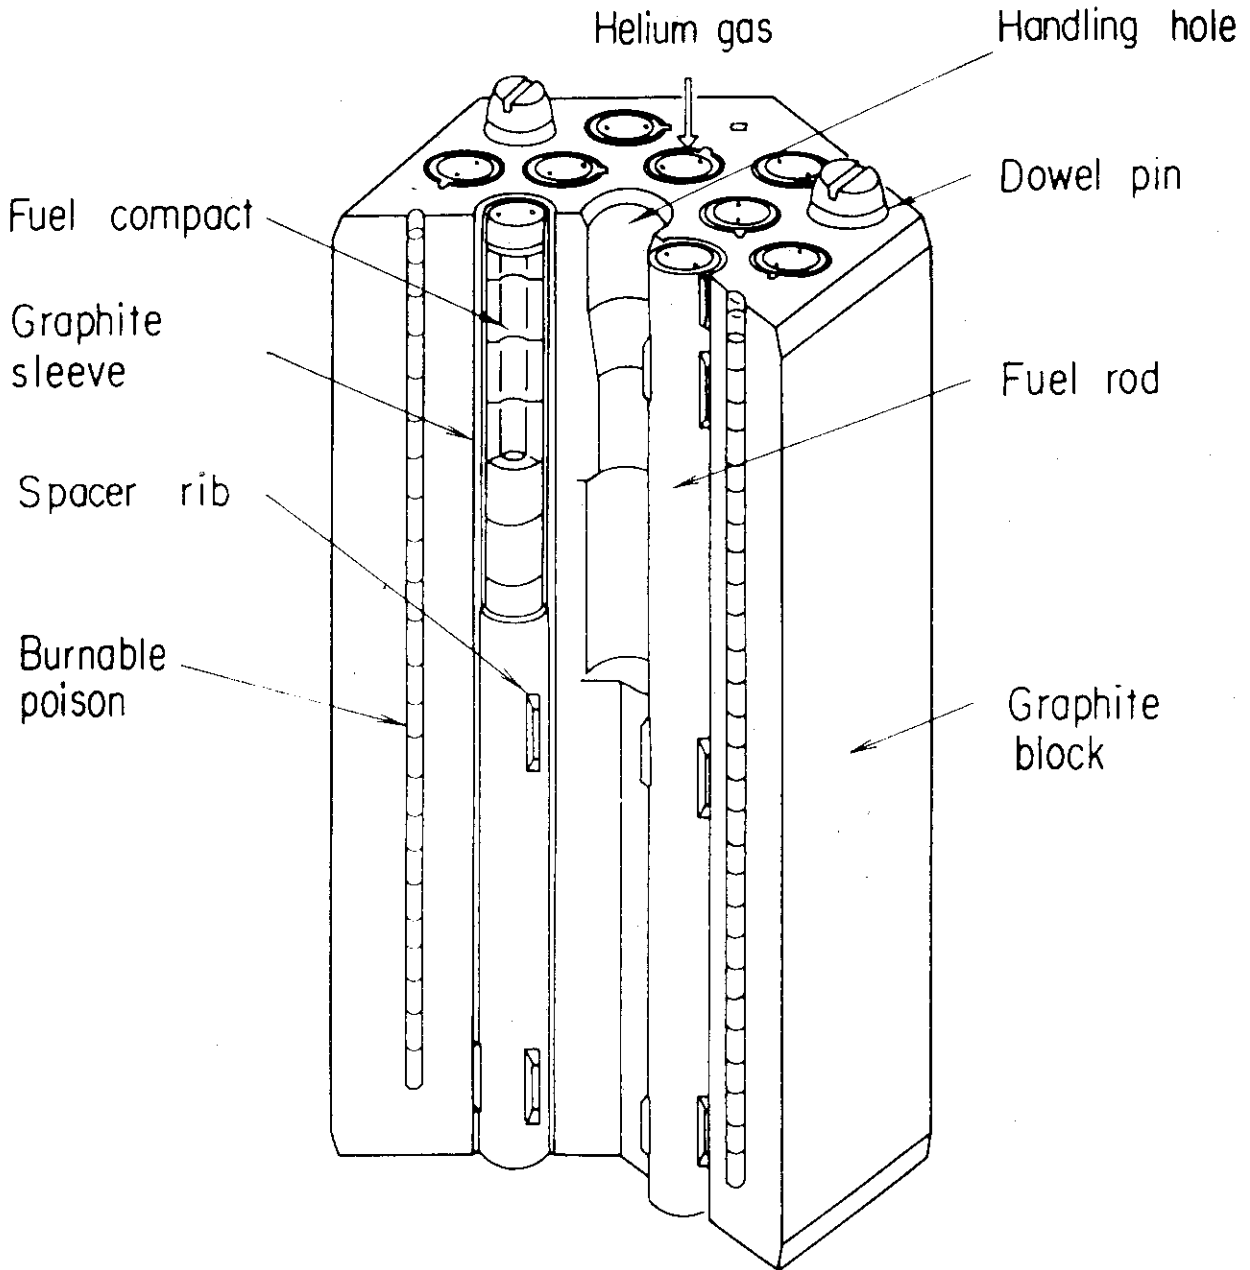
Structural drawing of a fuel element of detail design (I) in VHTR
